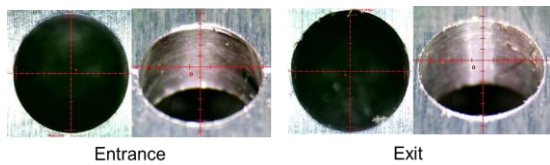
Appearance of hole after drilling A2017 with no deflection.
